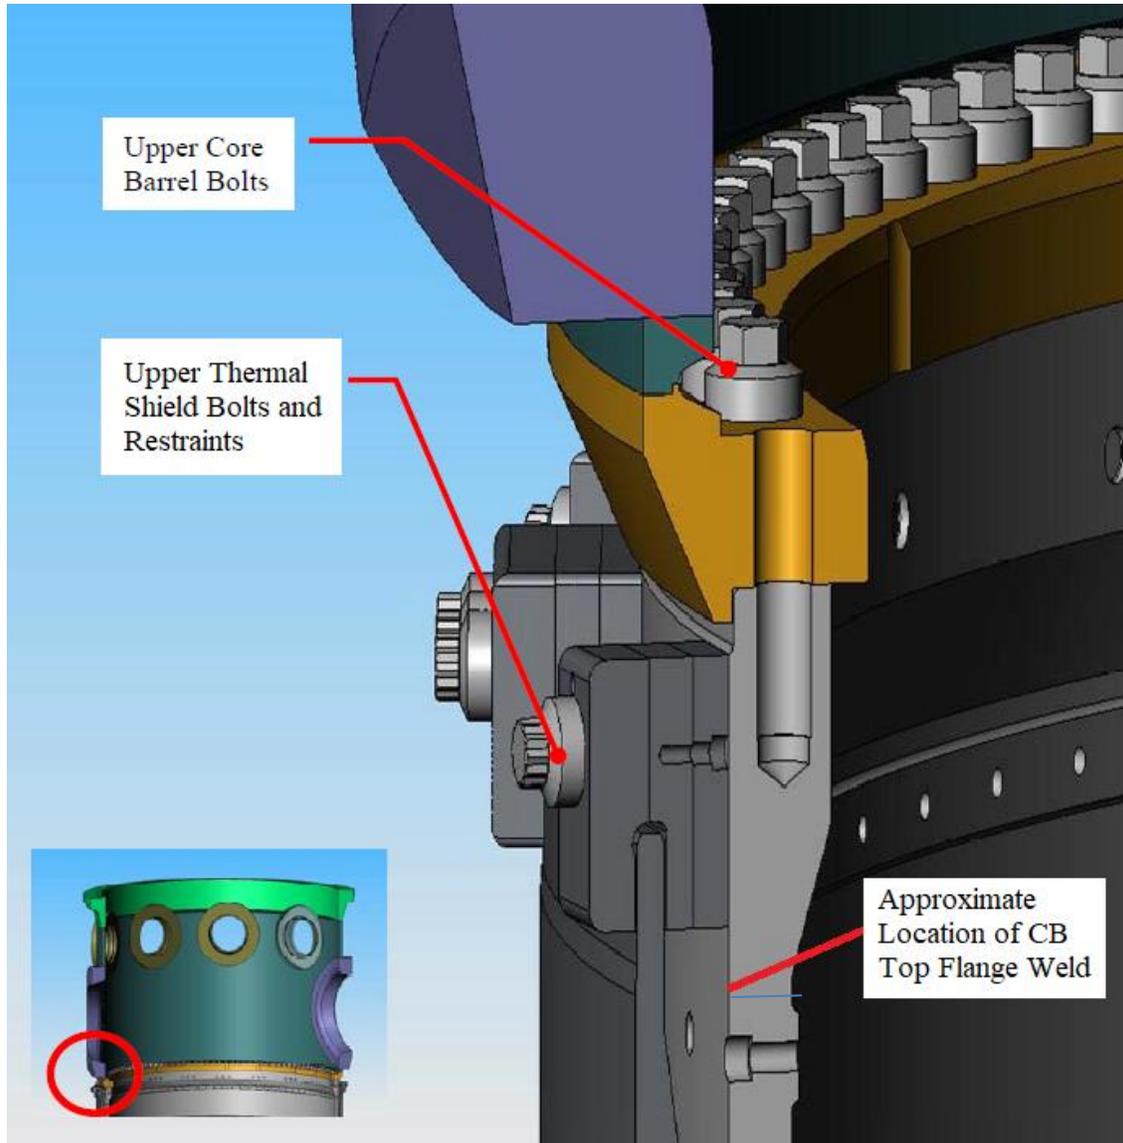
Location of CB Cylinder Top Flange Circumferential Weld – B&W-Designed PWRs
